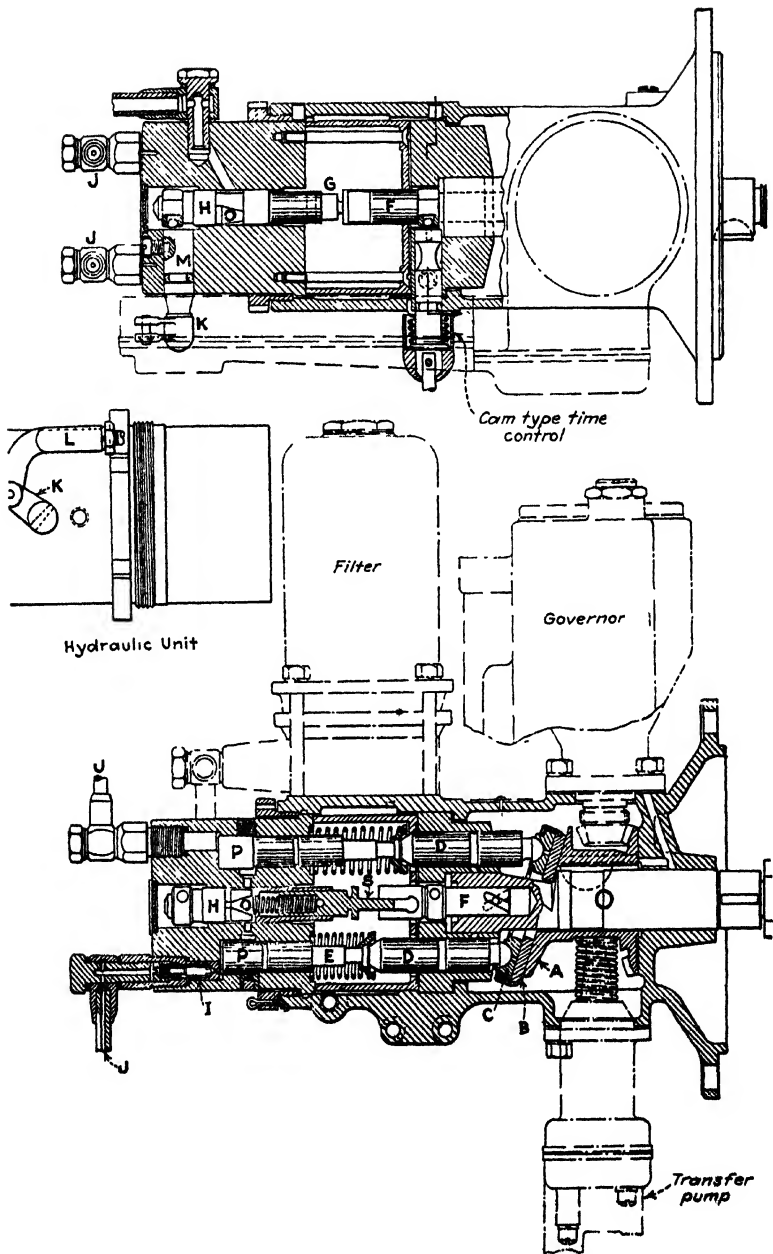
Section through Ex-Cell-O Type A fuel pump.
